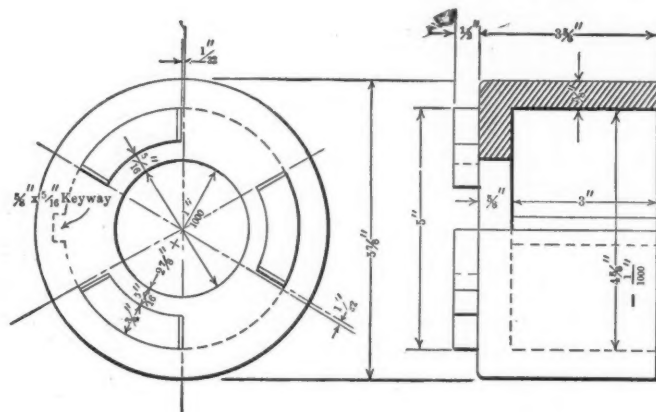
SPECIAL SLEEVE CLUTCH KEYED TO THE HUB OF GEAR NO. 2 OF THE 42-IN. NILES LATHE.
